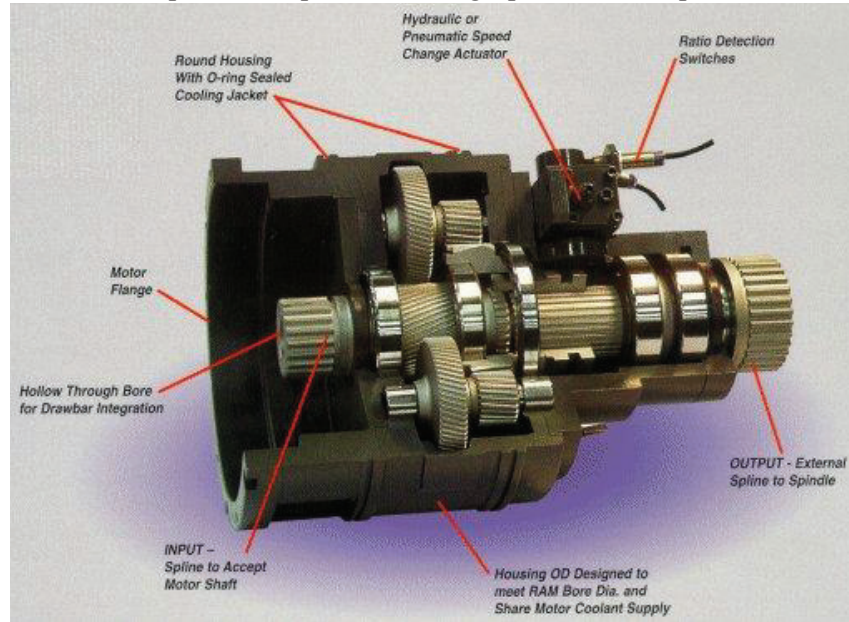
Typical Standard 2-speed planetary gearbox
